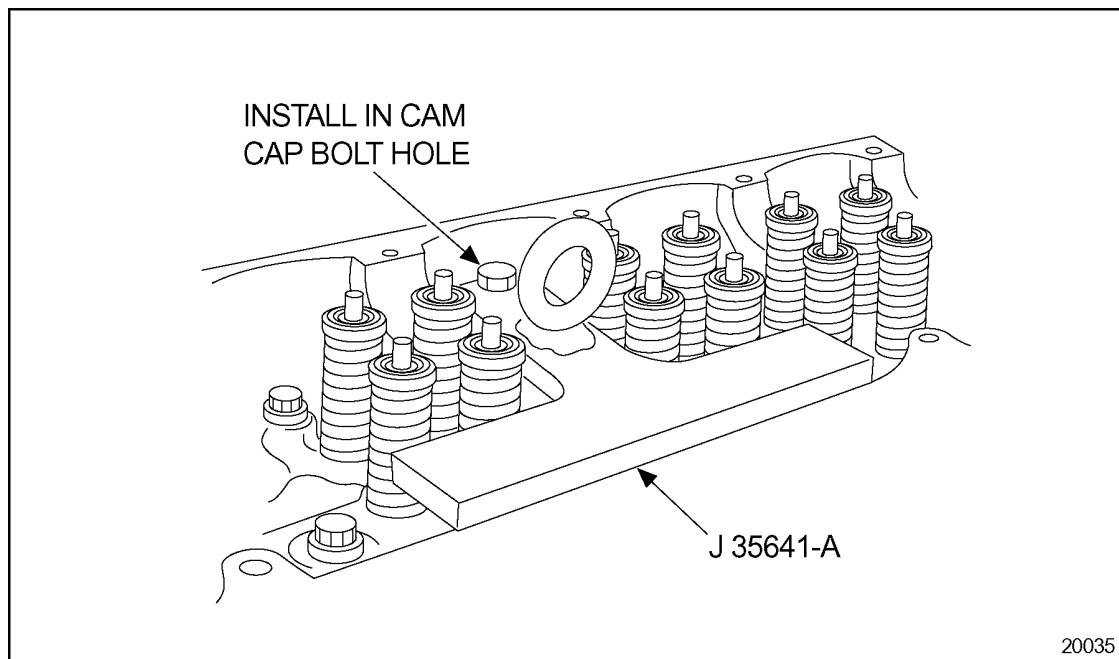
Cylinder Head Lift Bracket Installation
